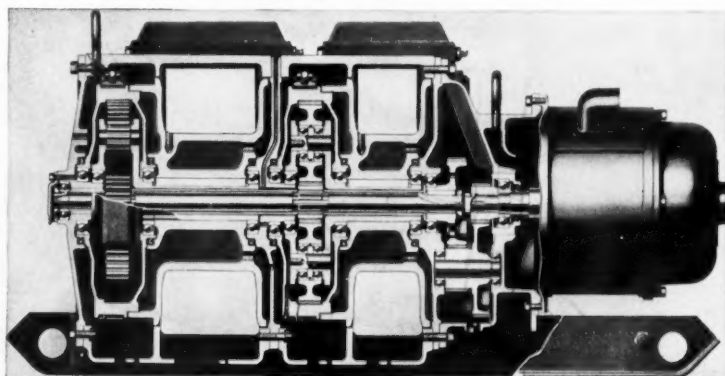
Details of the Ingersoll-Rand double drum electric tugger hoist. Note extensive use of ball bearings, and fully enclosed gear cases.
